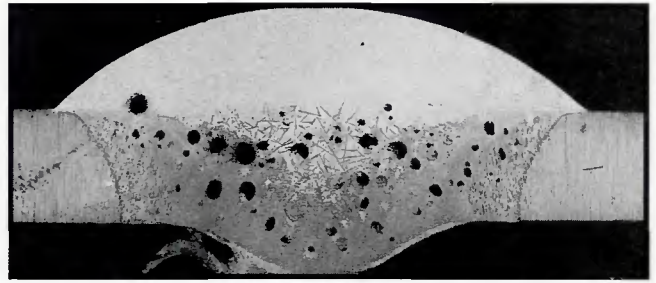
Weld made with no preweld heat treatment, AC, ER5356 (no etchant, 11X).
